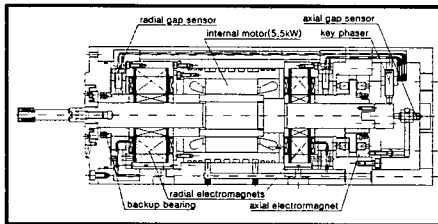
Machine Tool Spindle with Magnetic Bearings for Internal Grinding Machine (KIMM)
